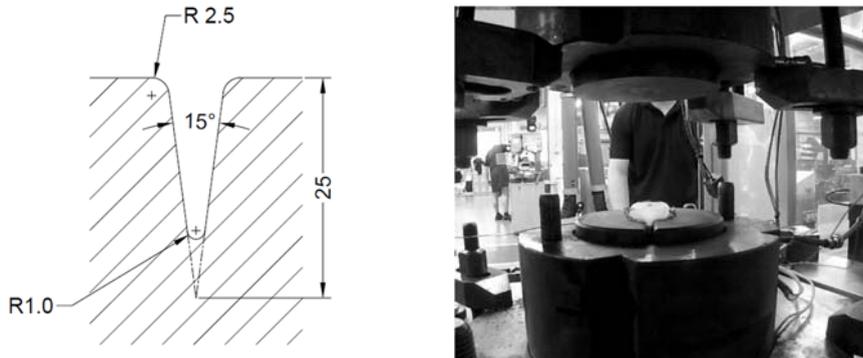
a) Groove dimensions and b) T-Shape tooling together with the deformed specimen.
